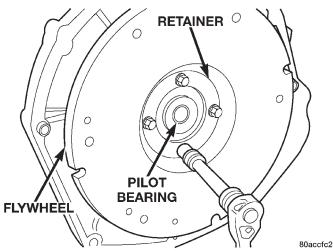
Pilot Bearing Retainer Bolt Removal/ Installation
